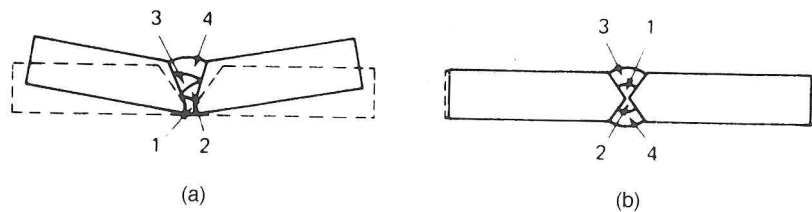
Edge preparation to reduce distortion: (a) single-V preparation giving considerable distortion (1 first welding run, 2 second welding run, 3 third welding run, 4 final welding run); (b) double-V preparation giving only slight shrinkage
